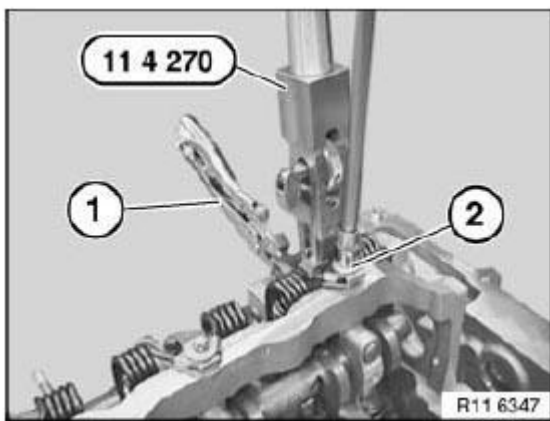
Identifying Torsion Spring Screw With Special Tool (11 4 270)
